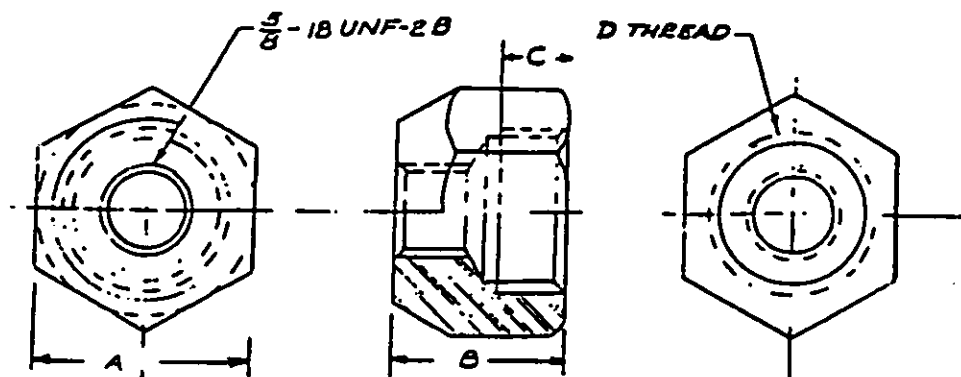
Type XIII, class 2, style A, puller adapter, mechanical, gear and bearing, female thread with 5/8 - 18 UNF-2B tapped hole.
